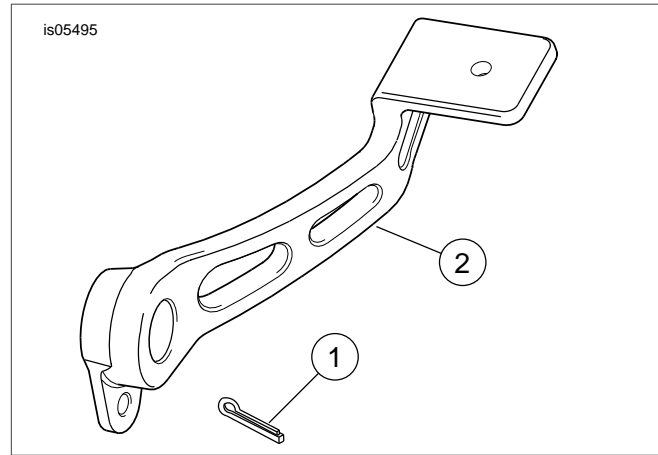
Service Parts: Billet-Style Rear Brake Lever
